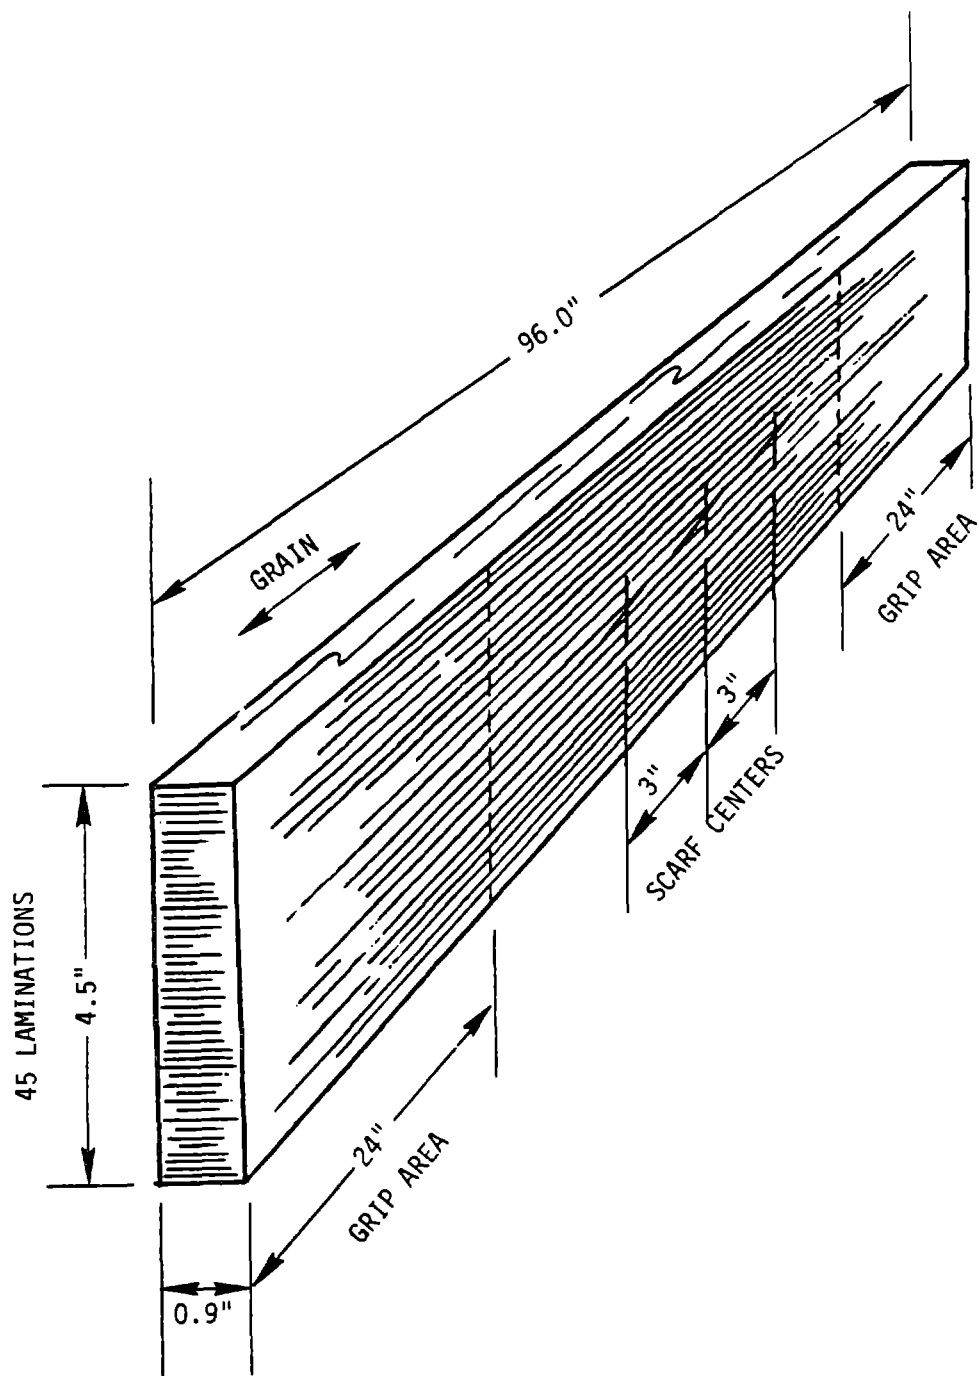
"Plank" Style Static Tensile Test Specimen
